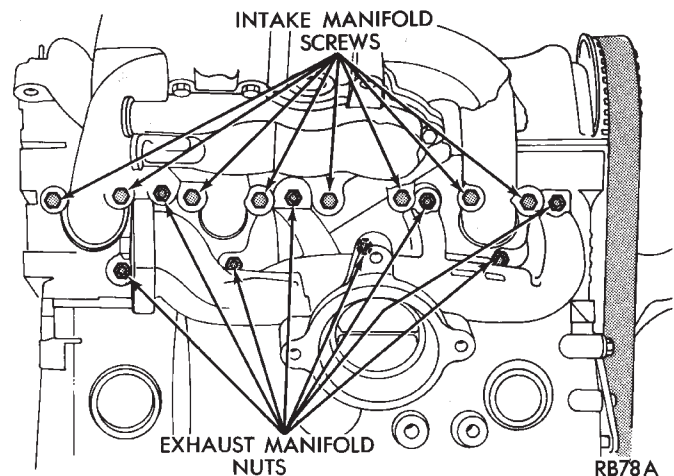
Intake and Exhaust Manifold Attaching Points—2.2/2.5L Engines
